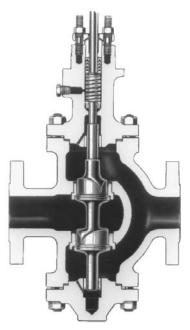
Double-ported globe-body assembly. (Courtesy of Fisher Controls International, Inc.)
